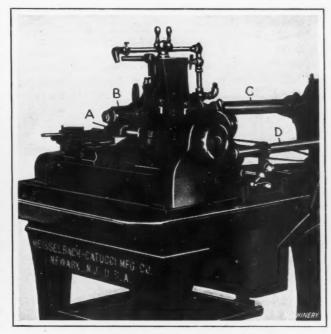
Hobbing Machine used for cutting Instrument Gears
